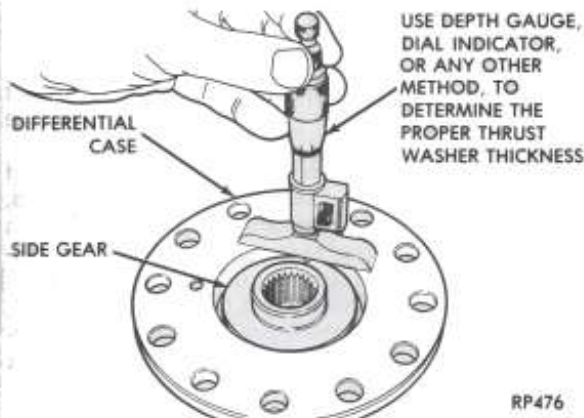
Determine Proper Side Gear Thrust Washer Thickness
